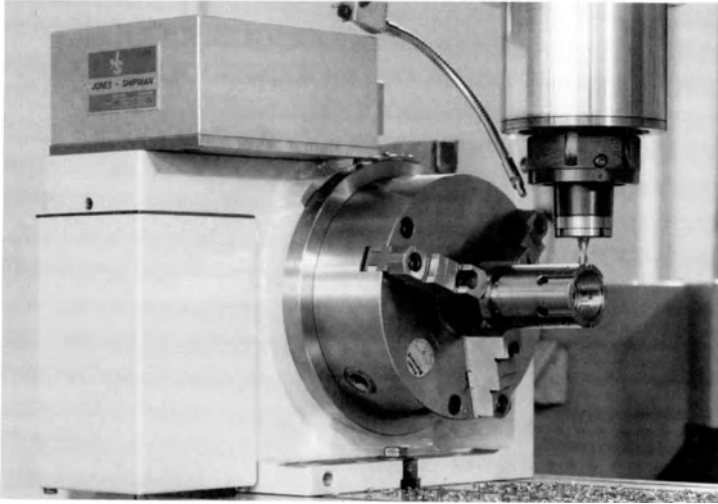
A “full” 4-axis rotary table on a vertical machining centre. This extra CNC axis offers greater machining versatility. [Courtesy of Jones & Shipman.]
